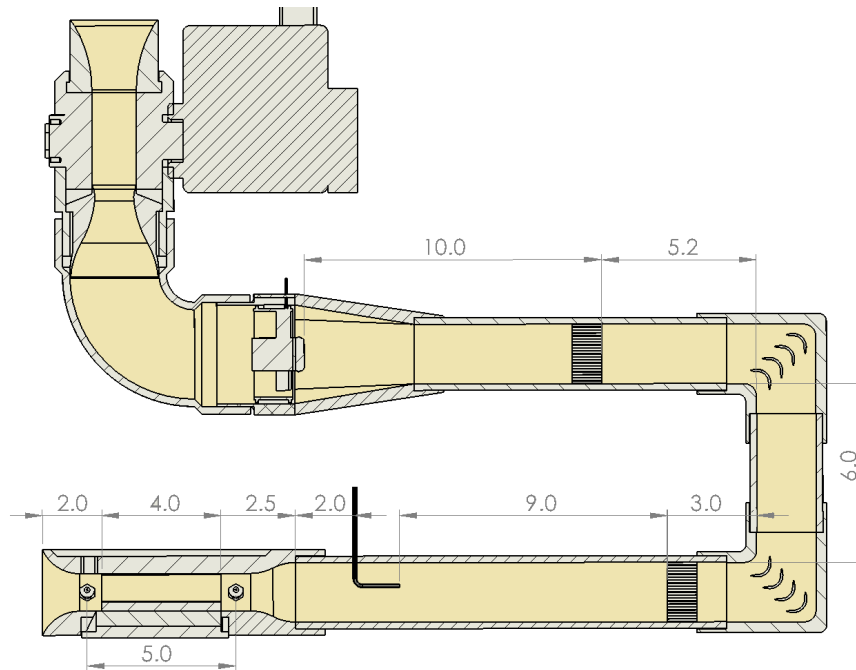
Wind Tunnel Sectioned View with Dimensions, in Inch.
